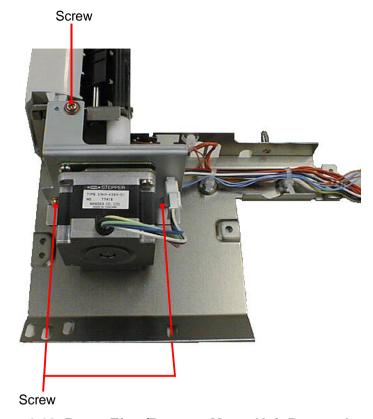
Paper Eject/Reverse Motor Unit Removal
